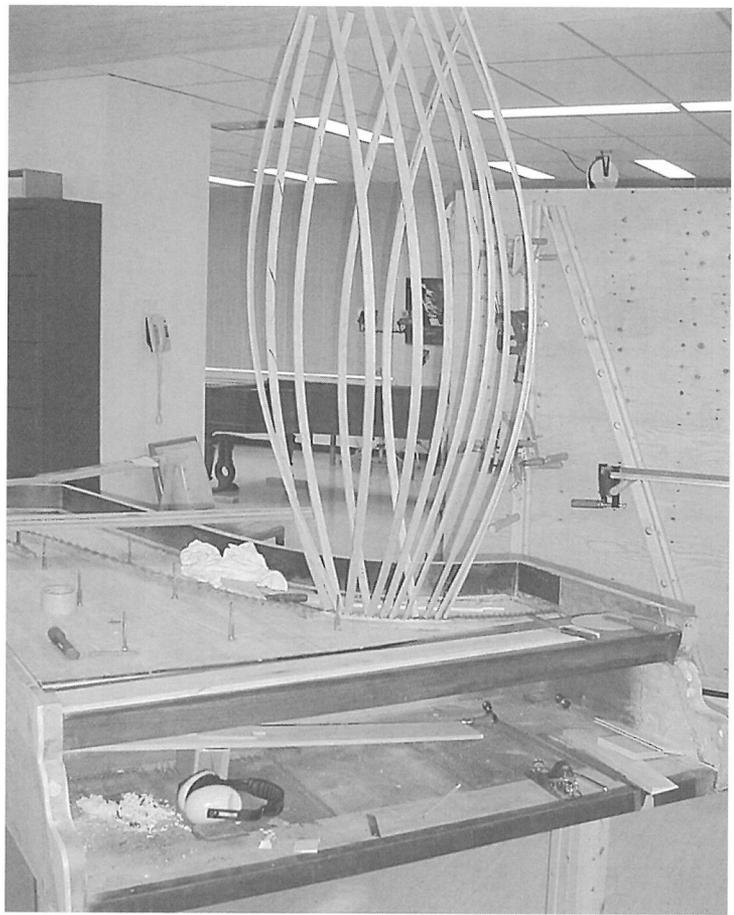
The springiness of thin wooden slats is employed to apply pressure to a glue joint on a keyboard instrument. The plywood sheet above is firmly attached to the roof beams above the dropped ceiling. (Courtesy of Cantos Music Foundation.)
